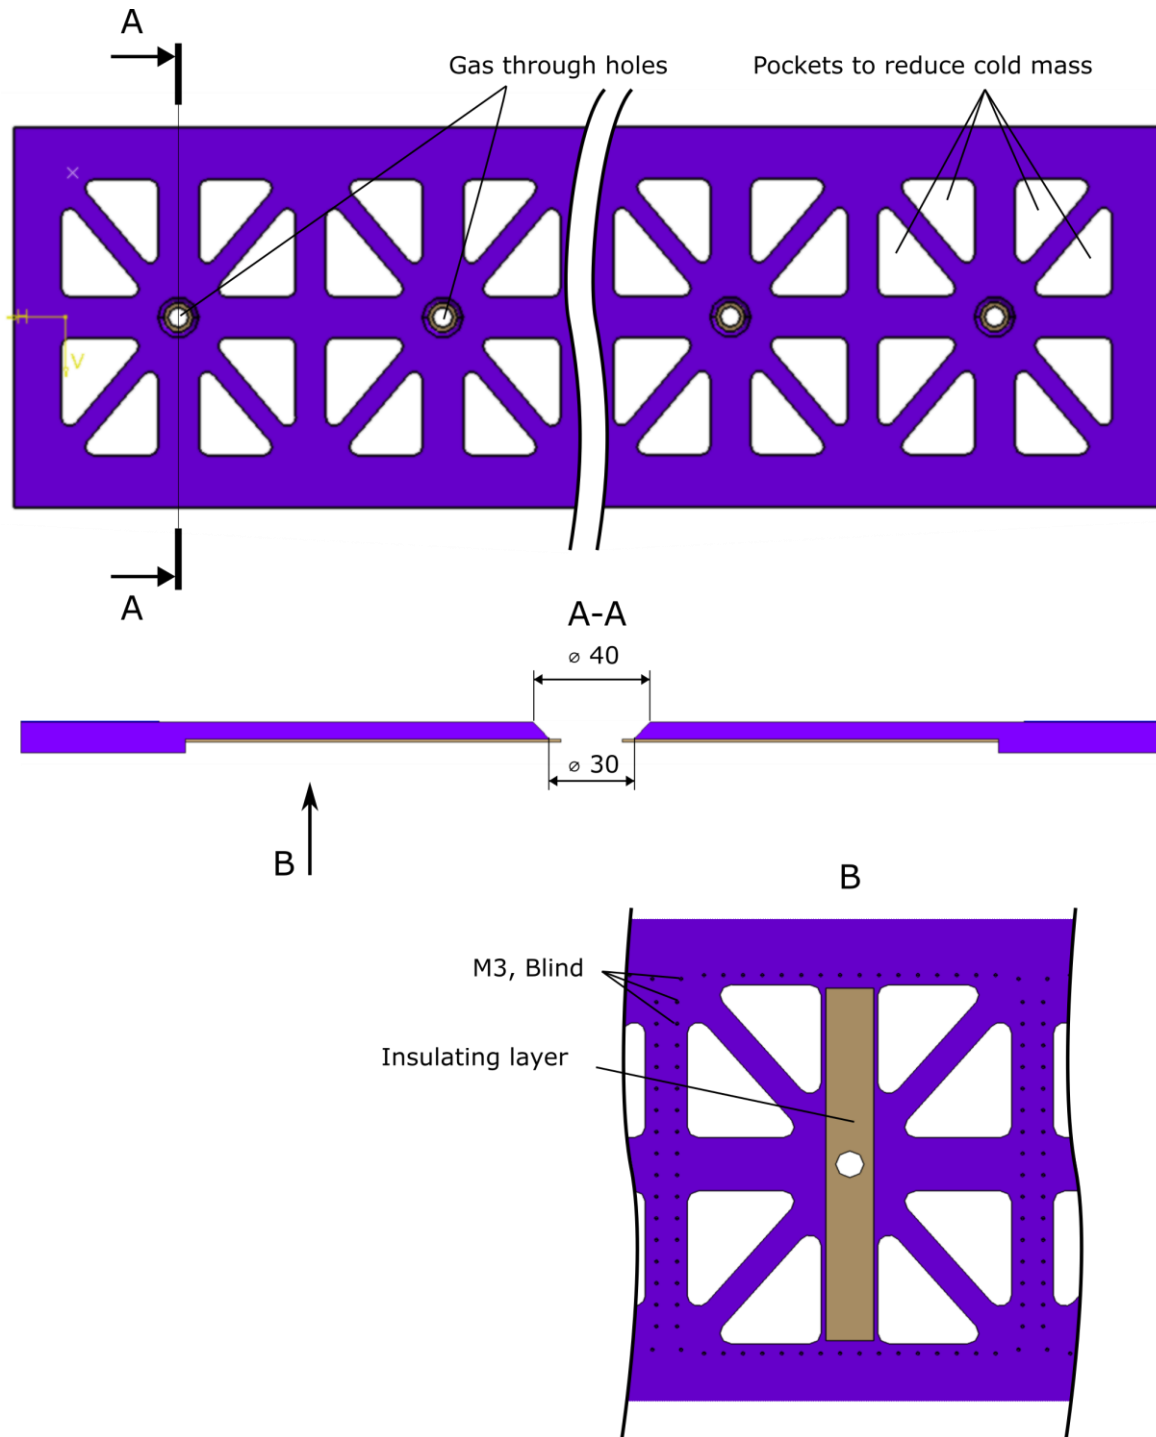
Conceptual design of cold separation plate. Top view, section view A-A, bottom view B.
